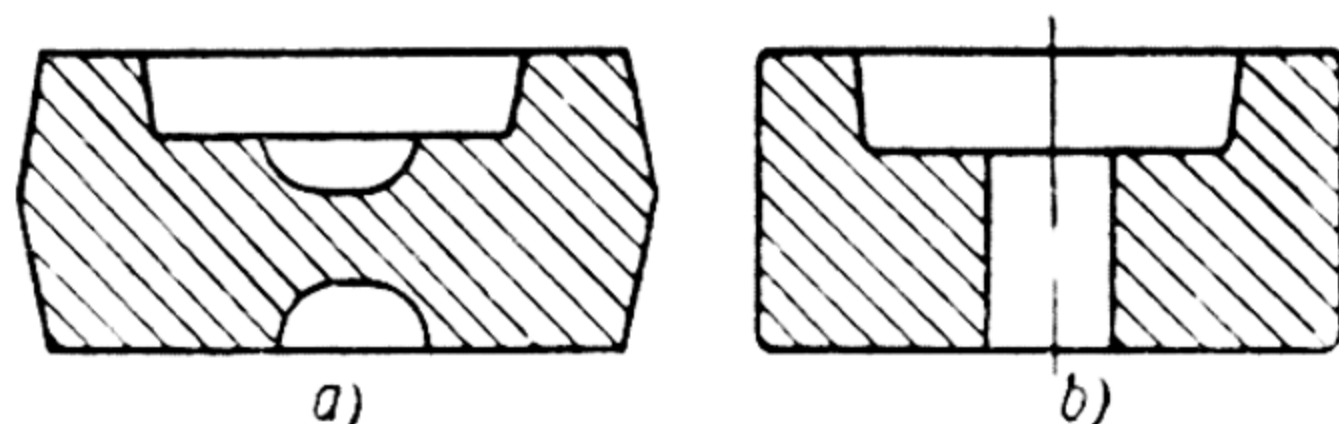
Work forged in hammer (a); the same work upset in a forging machine (b)
